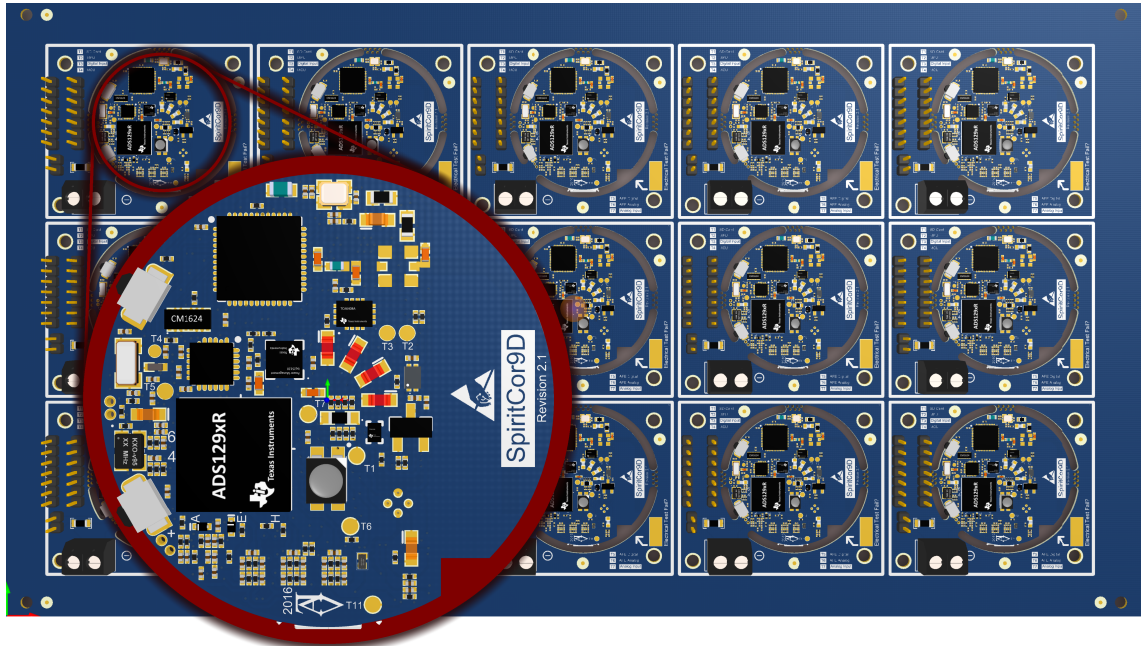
A 3D view from Altium Designer of the Final panelized PCB
